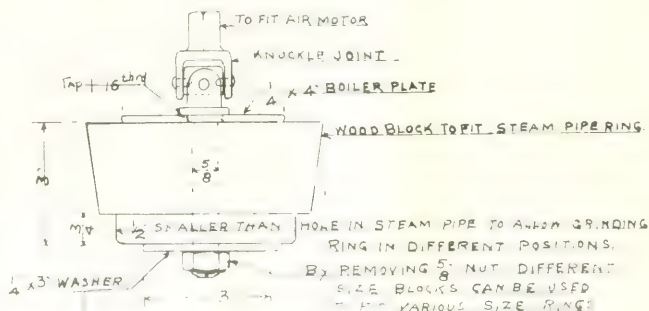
DETAILS OF DEVICE FOR GRINDING STEAM PIPE RINGS IN SMOKE BOX AFTER HEADER
